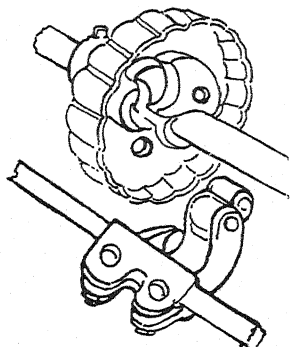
Corn-planter clutch and clutch stop on check fork.
